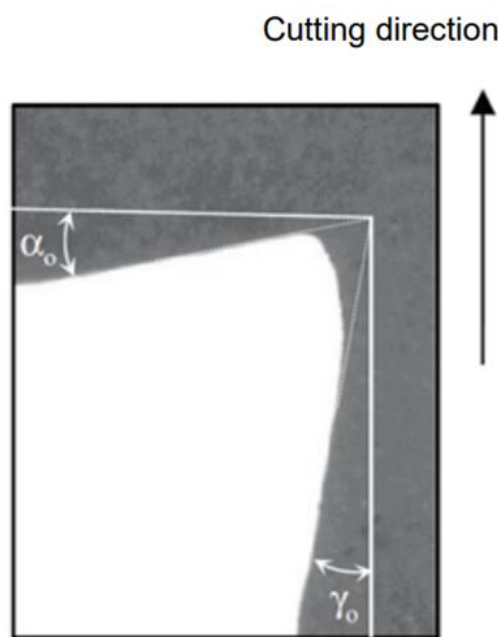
A cross section of a replica from a cutting edge when machining FRPs (α_0 is the rake angle and γ_0 is the clearance angle) [8]
